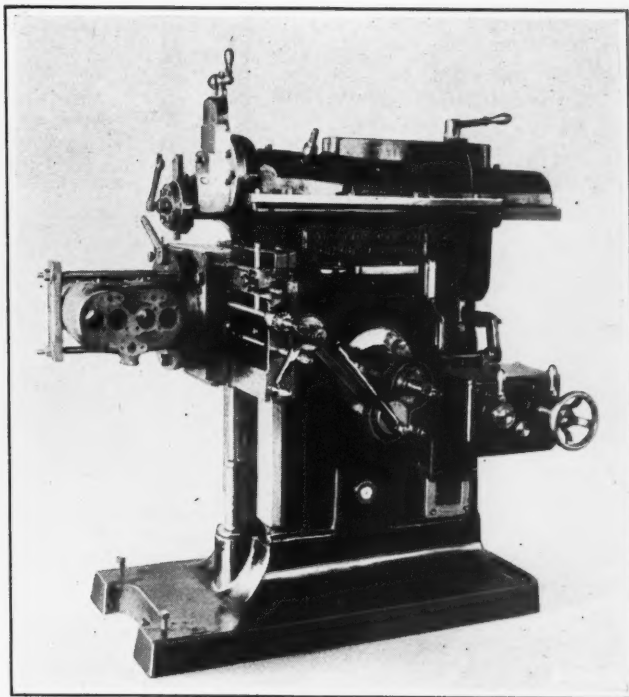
Using the Equipment shown in Fig. 1 for shaping a Side of the Cylinder Block
